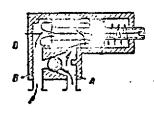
SMOOTH ENGAGEMENT MECHANISM
